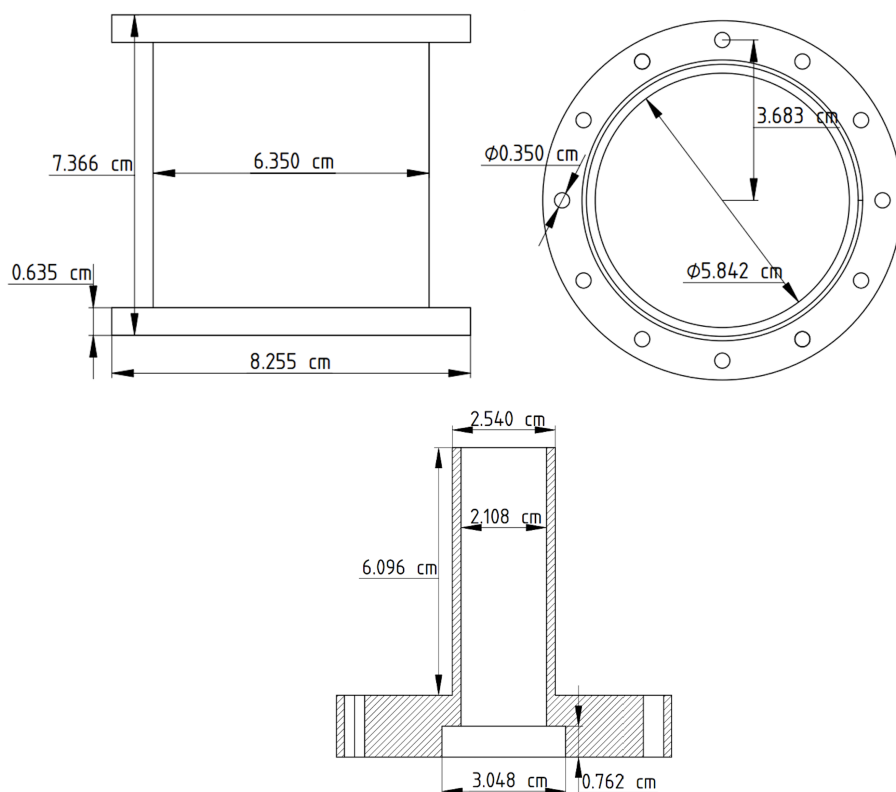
Engineering drawing of 6061 aluminum LED housing. Top row show the double flanged body. Bottom is the half nipple.
